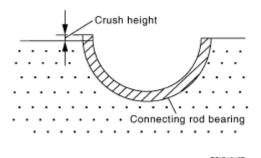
Identifying Crush Height Of Connecting Rod Bearing
